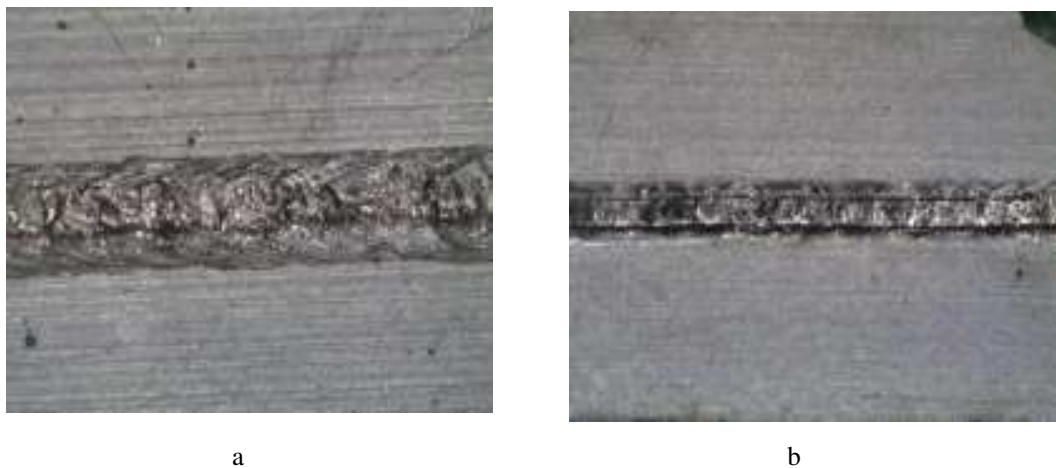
Weld beads with different BL core: mantle ratios: a - Full penetration No. 2
